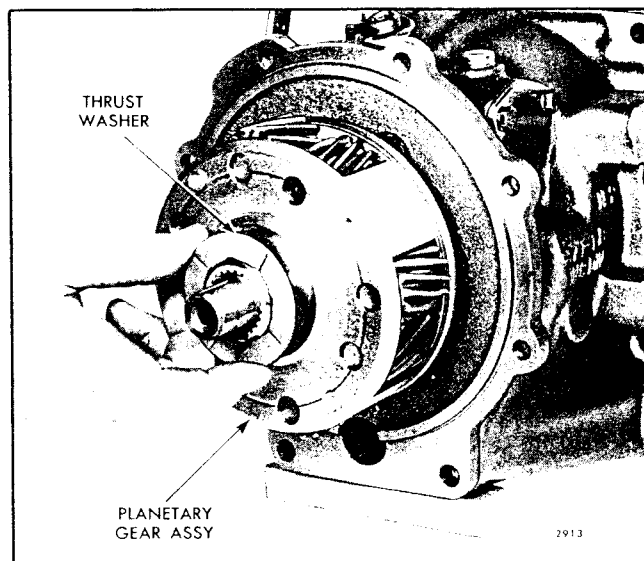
Installing Thrust Washer on Hub of Planetary Gear Assembly (2.1:1 Ratio)
